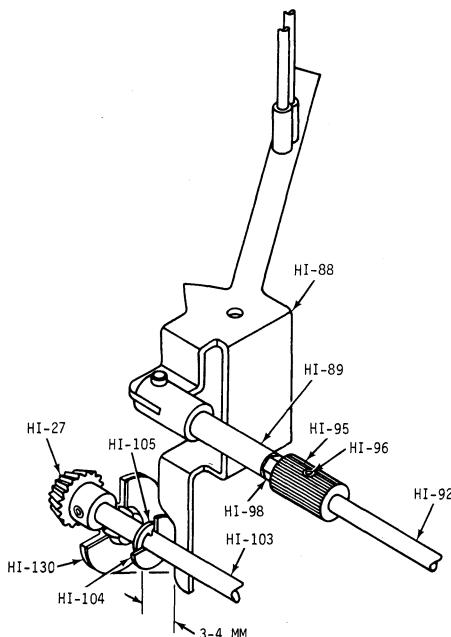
RIBBON REVERSING ROD ADJUSTMENT
